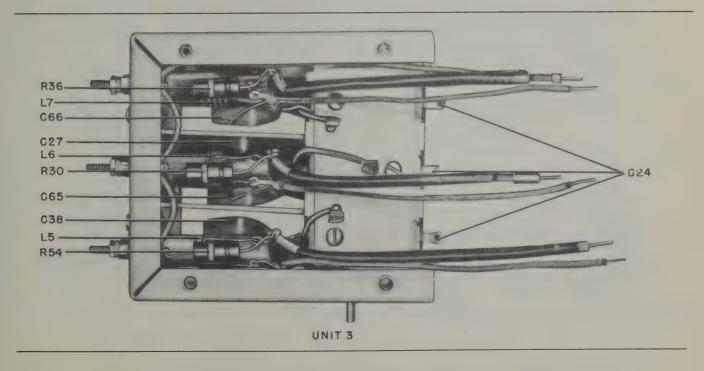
Radio Frequency Oscillator O-165/UR, Multiplier Tuning Assembly, Left Side
